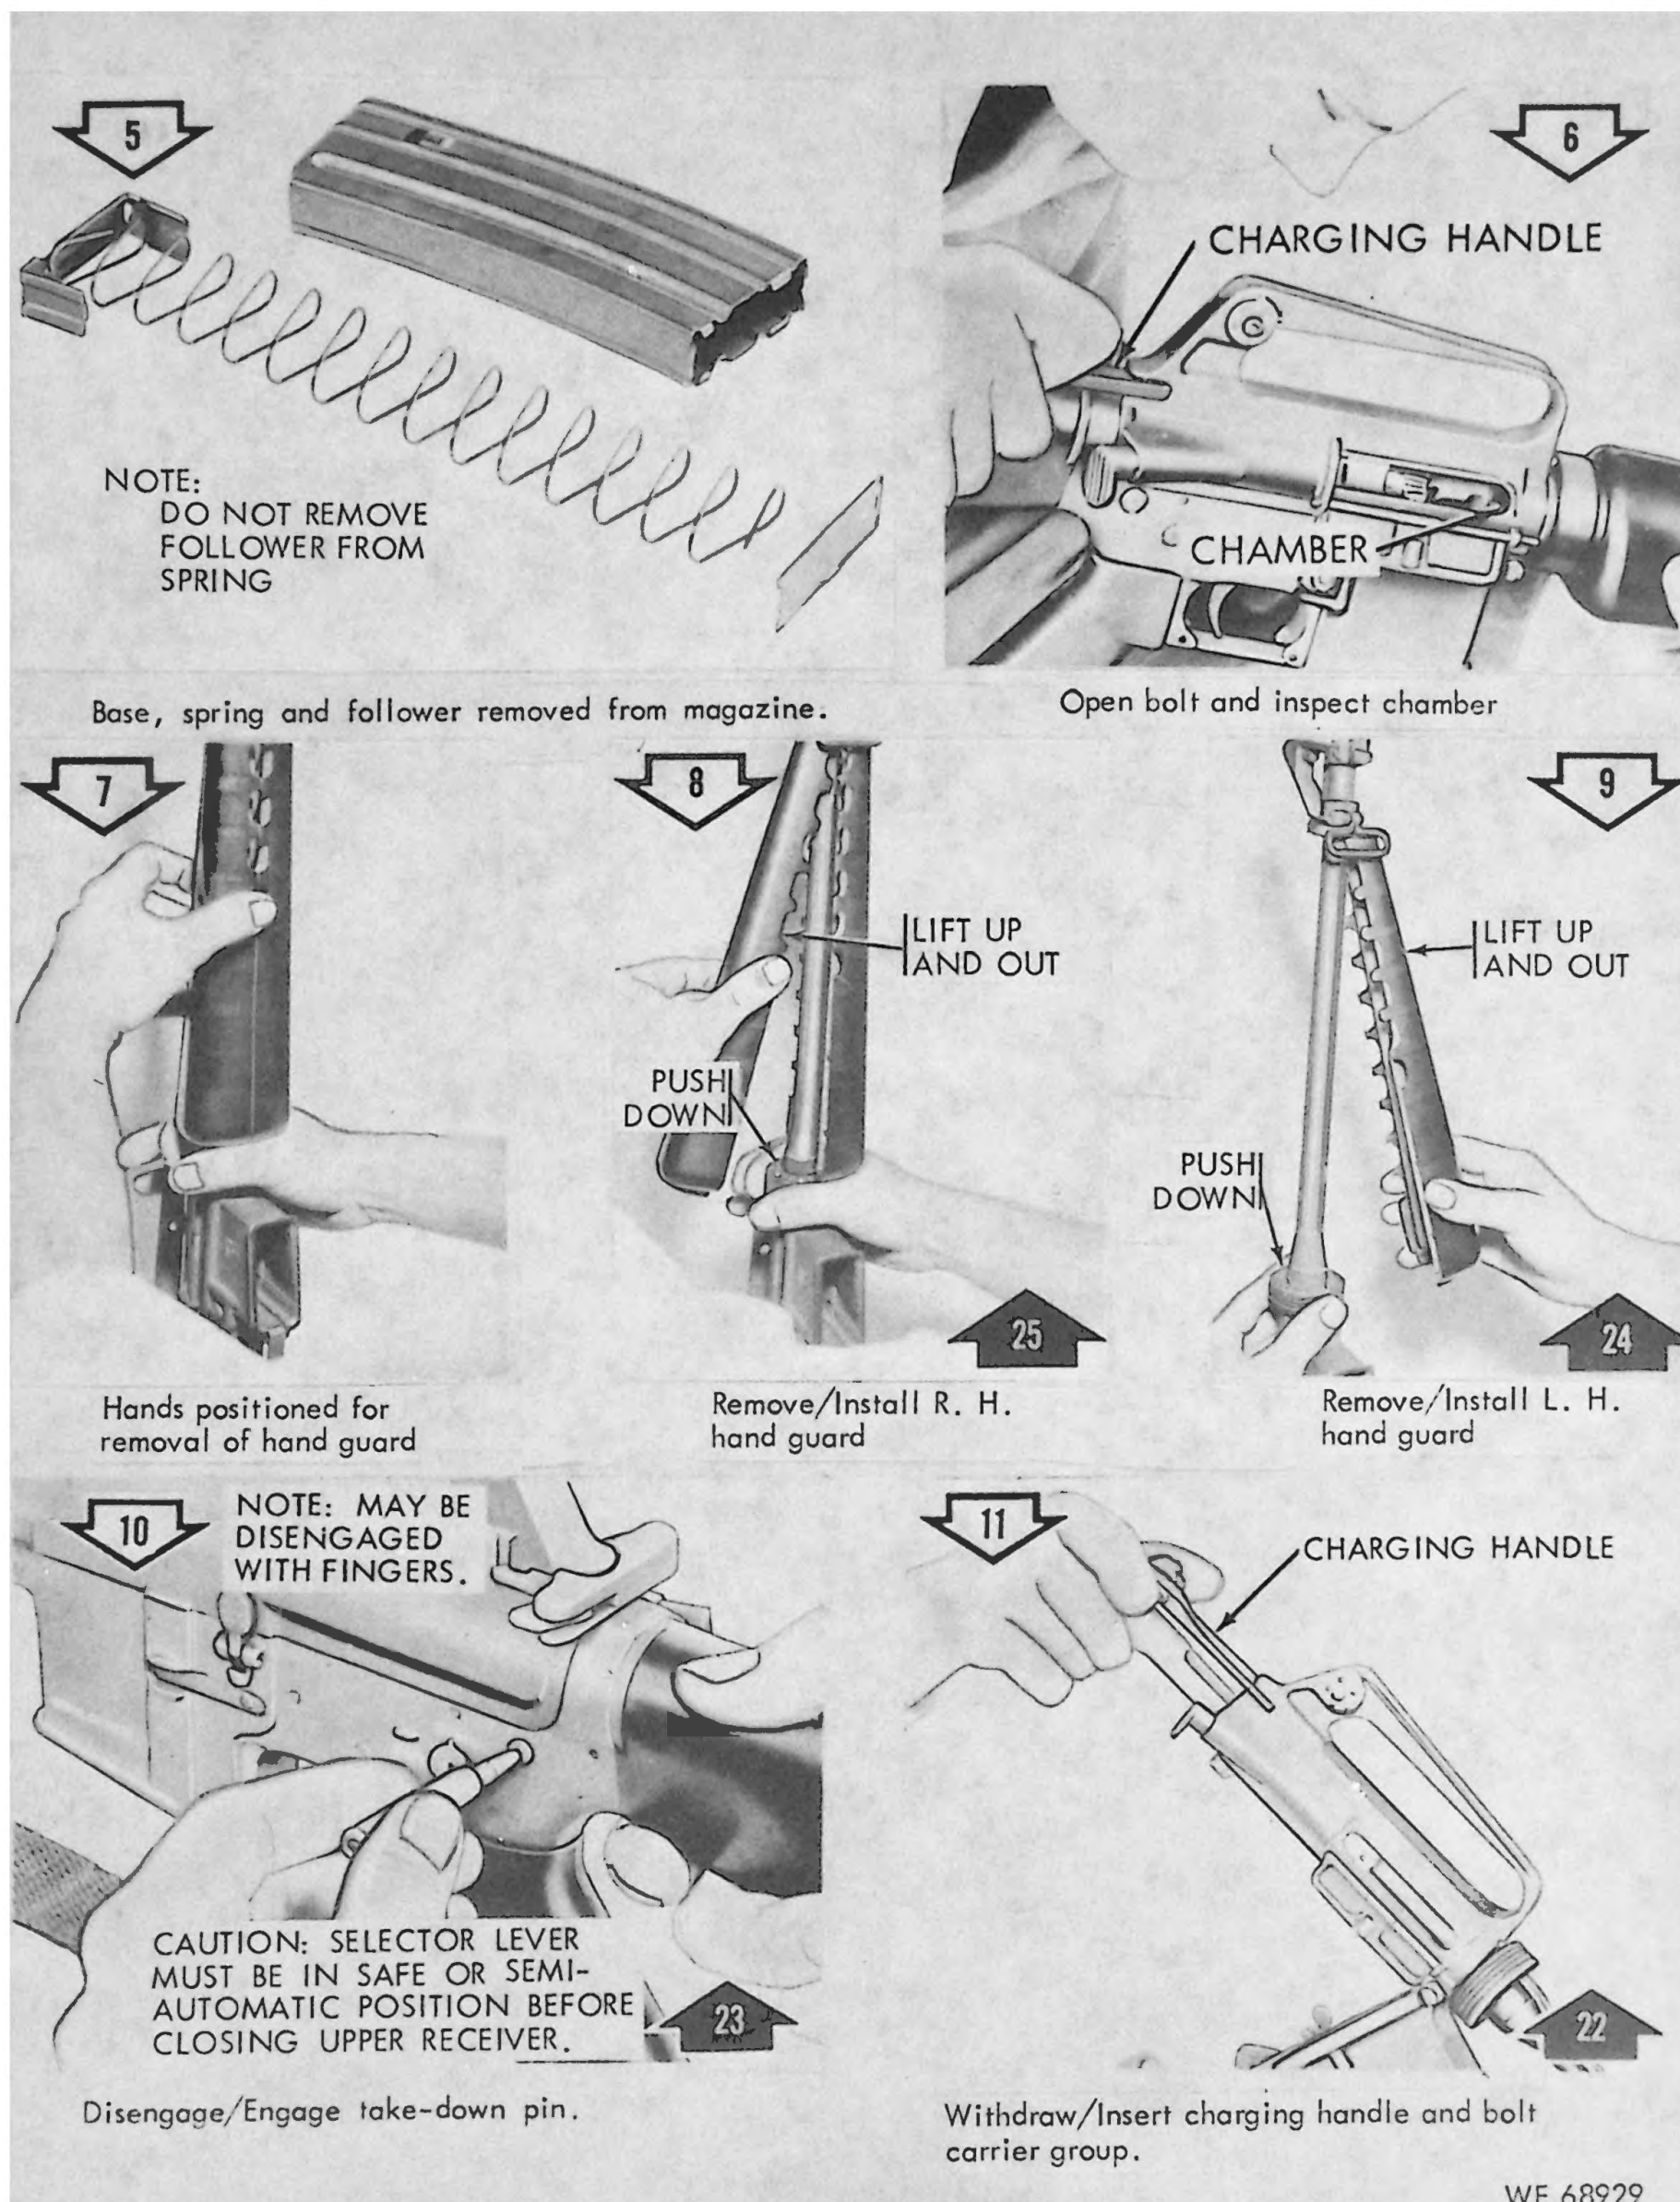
Disassembly/assembly of rifle. (2 of 8)
